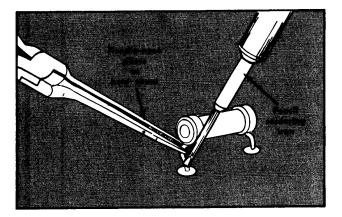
Apply the soldering iron to the heat-shunted lead when removing a component from a circuit card.
